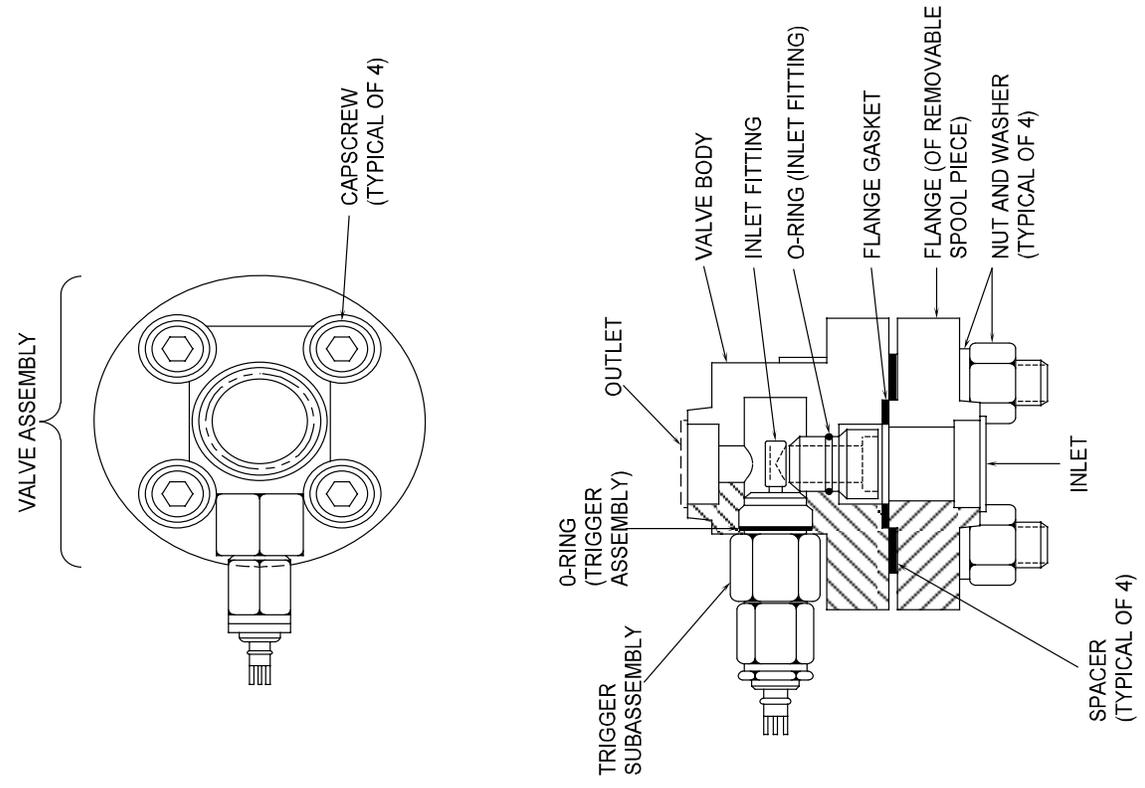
Explosive Valve (Cross Sectional View)
